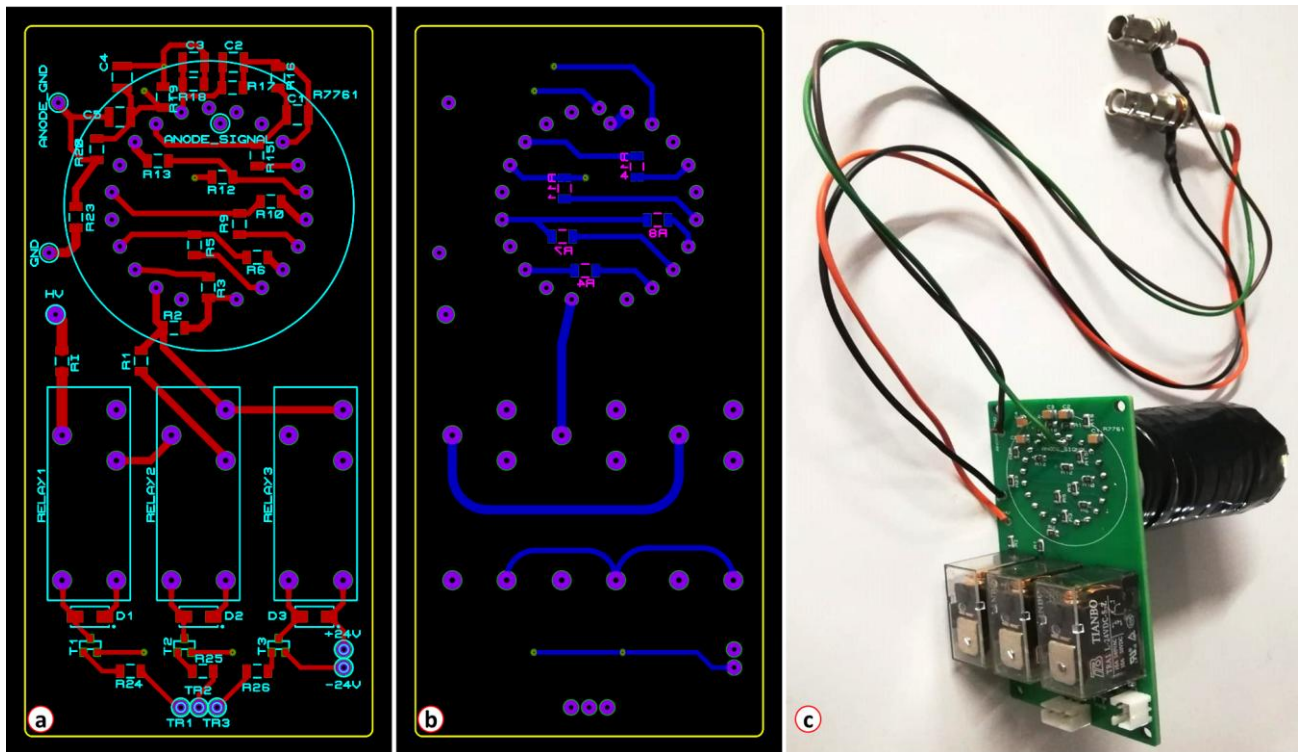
a) PCB layout view of the top side and b) bottom side c) Image of the electronic board with all soldering and assembly processes completed for the remote-controlled R7761 type PMT
